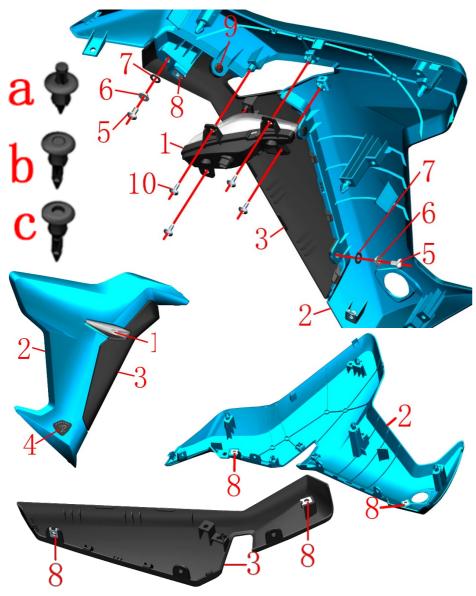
SURROUNDING COMPONENT		Right enclosure panel assembly	CHK	0
